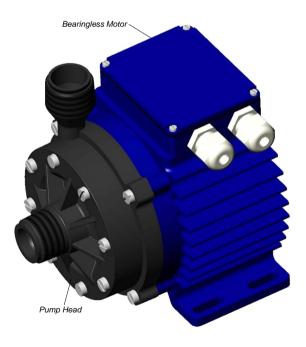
Bearingless motor with pump head LPP-600.5 (PP)
